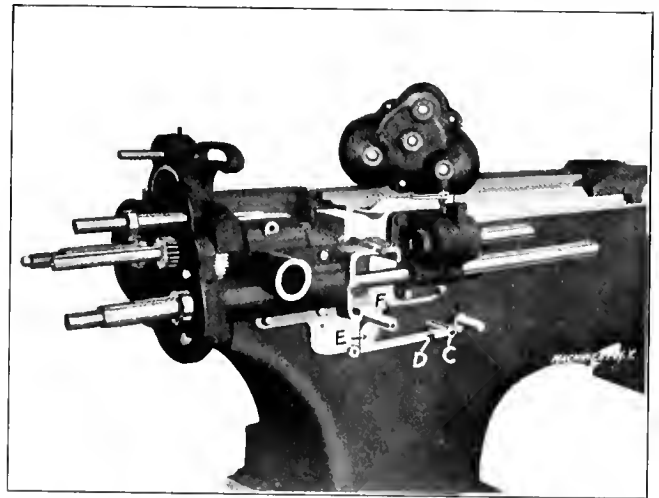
Method of Aligning Bracket and Feed Box on the Head End of a Turret Lathe
